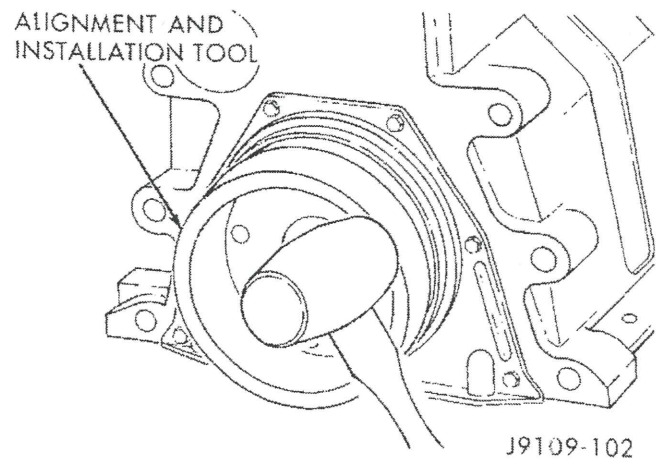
Crankshaft Rear Seal Alignment/Installation Tool
